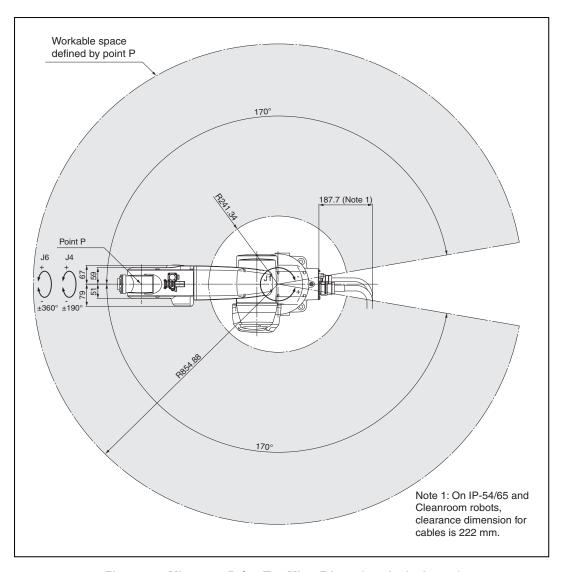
Viper 850 Robot Top View Dimensions (units in mm)
